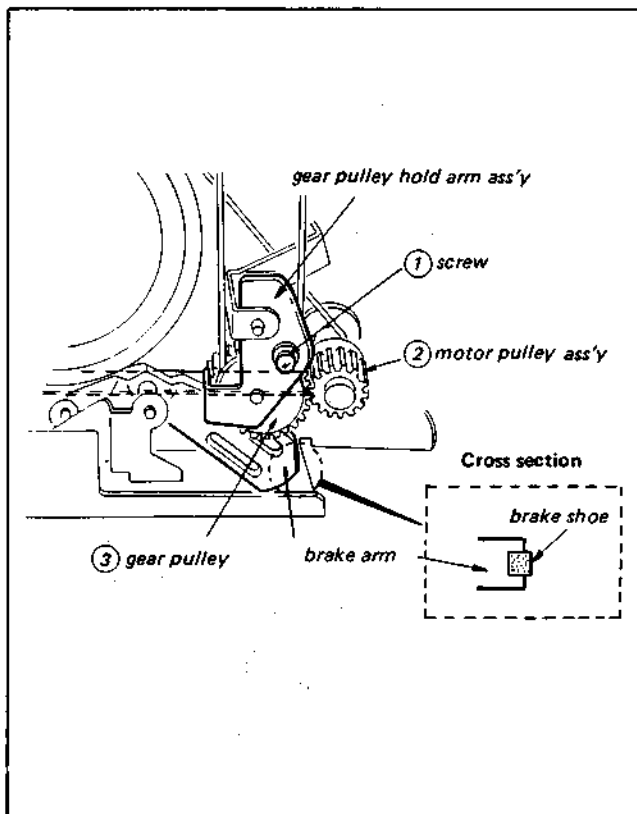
Position adjustment of gear pulley hold arm assembly
